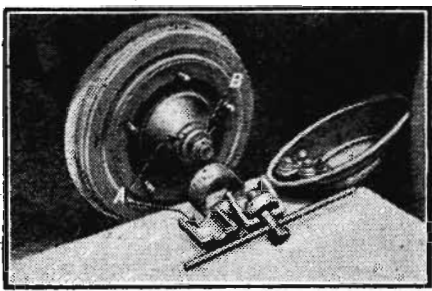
Hub puller dismantled. (A) Collars on hub and puller. (B) Hub nut to be removed.
